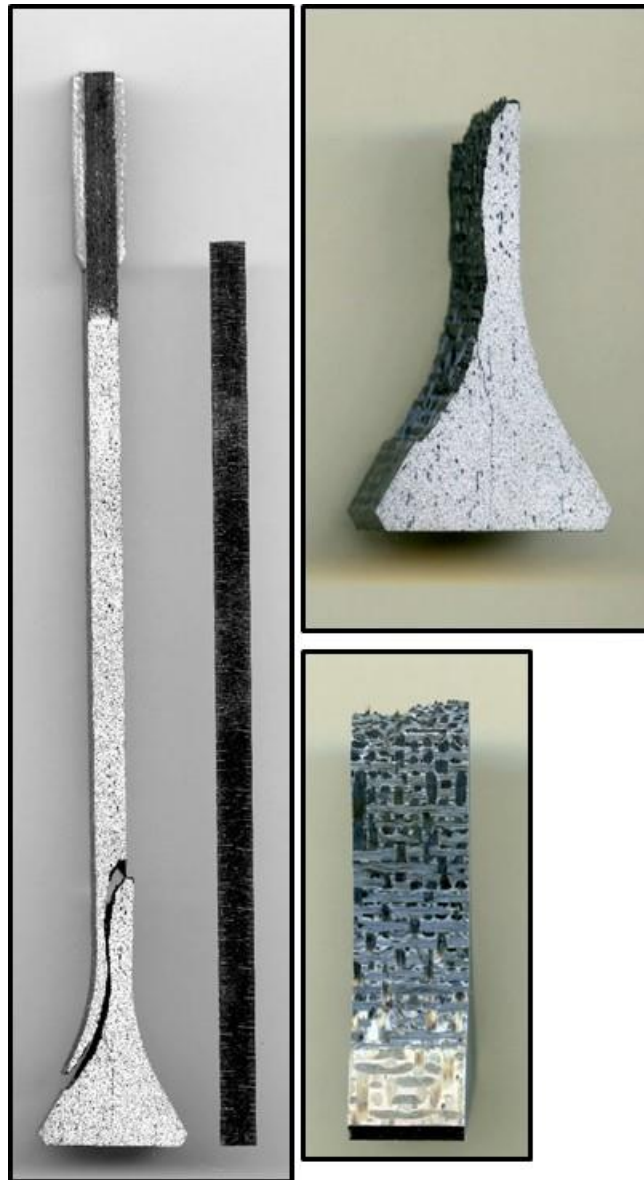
Optical Photographs Of Failed Stepped Tension Specimen (15-542)
